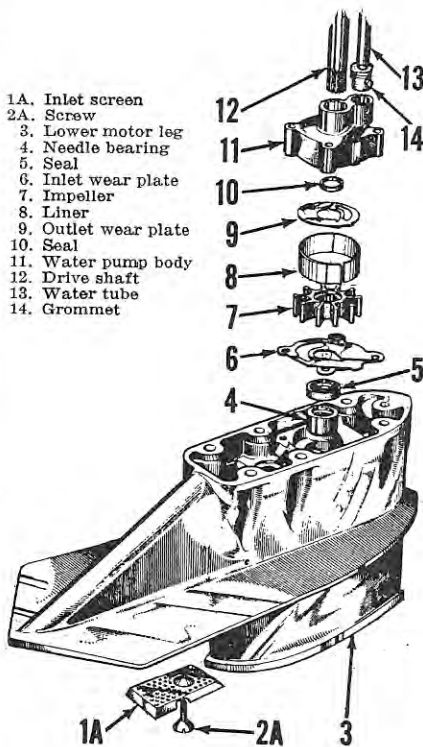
Exploded view of lower motor leg showing water pump and associated parts.
